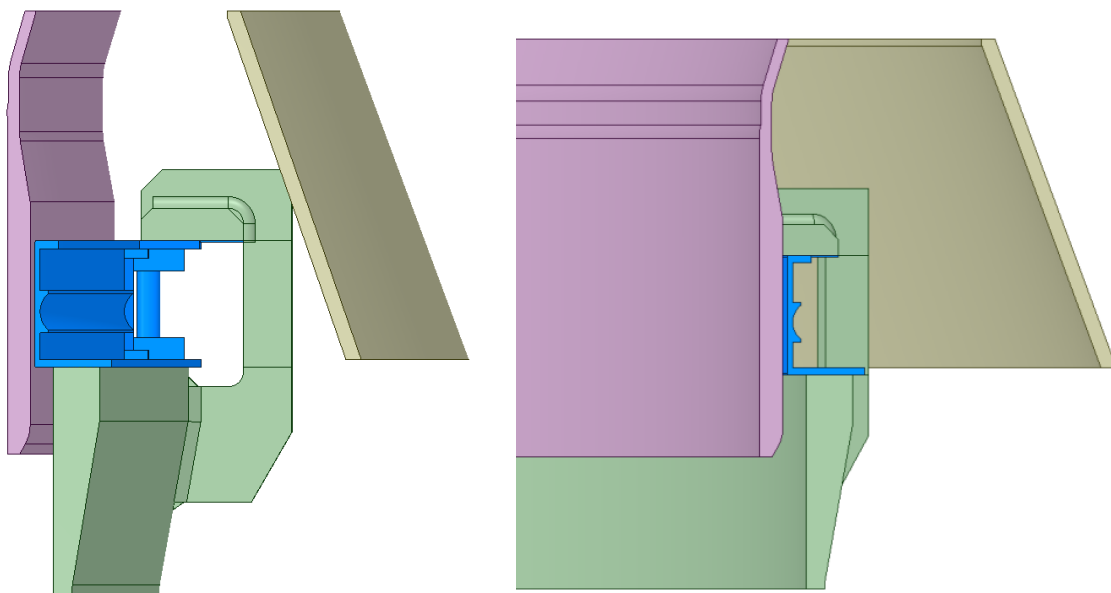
Assembly model of belt seal hot gas casing and combustion inner liner
